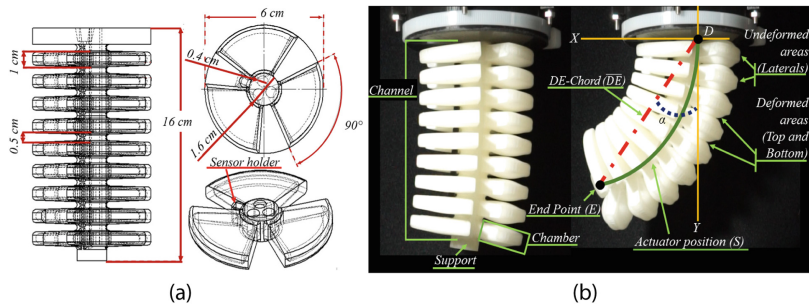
3D printed soft pneumatic actuator. (a) Sketch showing different views of the actuator and its dimensions. (b) SPA view of the actuator without (left) and with pressure (right).
